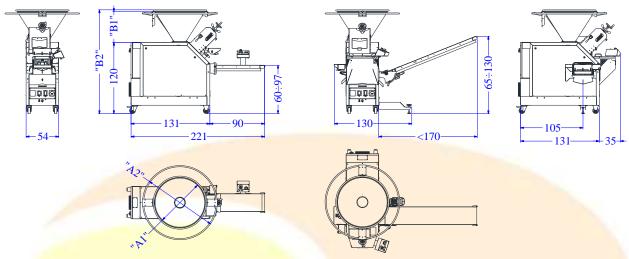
Overall dimensions of the machine with hopper equipped with sensor ring and spacer ring (*)
